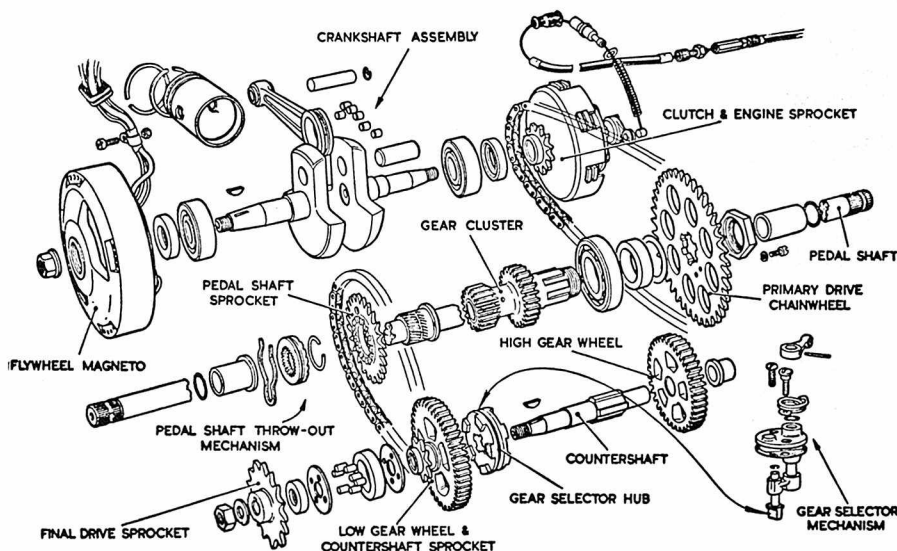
Exploded view of 3K crankshaft and two speed transmission.
